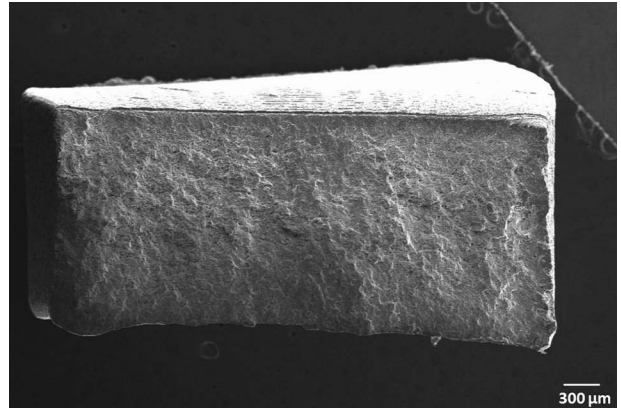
Fracture surface of room temperature aluminum alloy AA 2014-T6 sheet-45° tensile-tested specimen taken at low magnification
